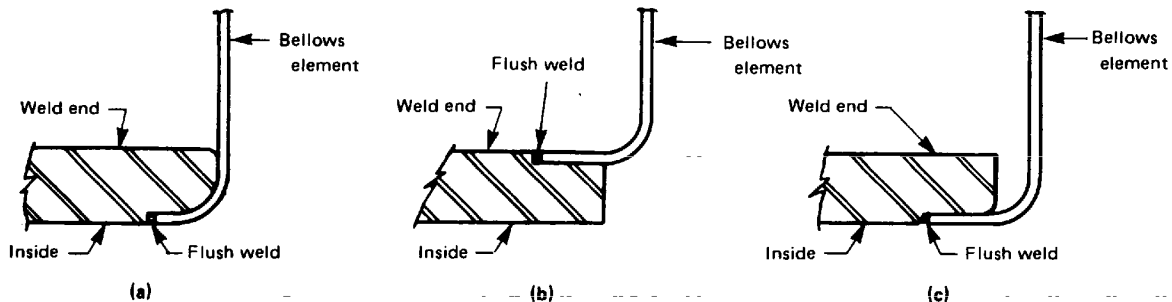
(c)-1 PERMISSIBLE ATTACHMENT WELDS FOR BELLOWS
